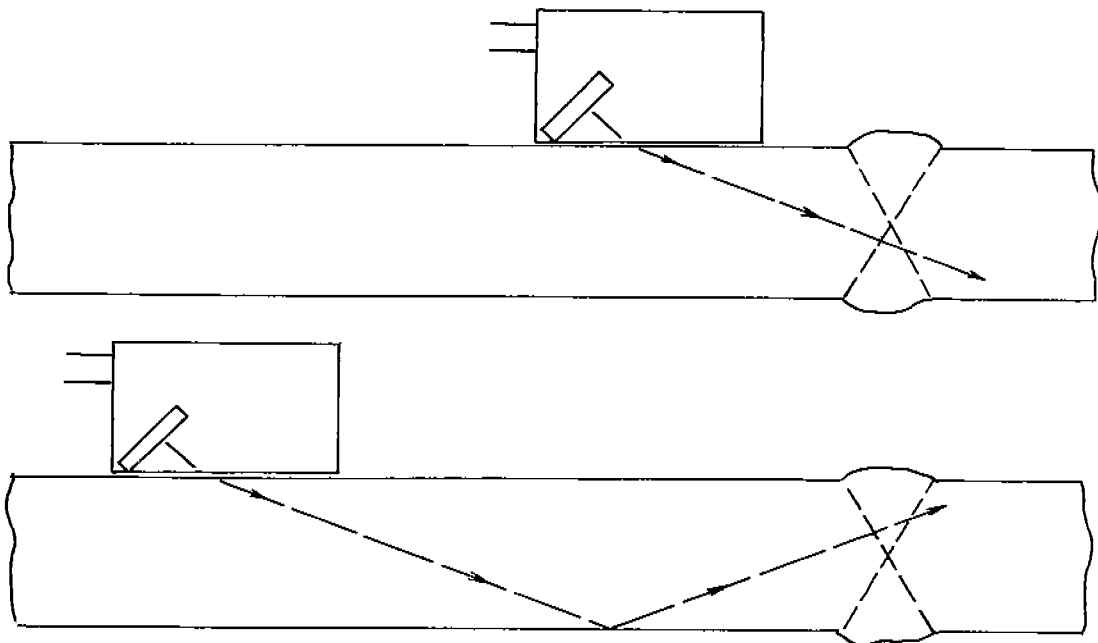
TECHNIQUE FOR INSPECTING BUTT WELDS WITH SHEAR WAVES
